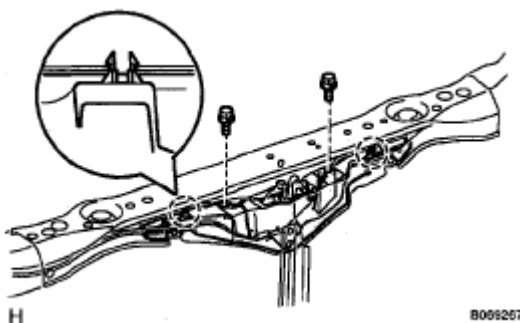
Identifying Hood Lock Control Cable Cover Bolts And Claws
